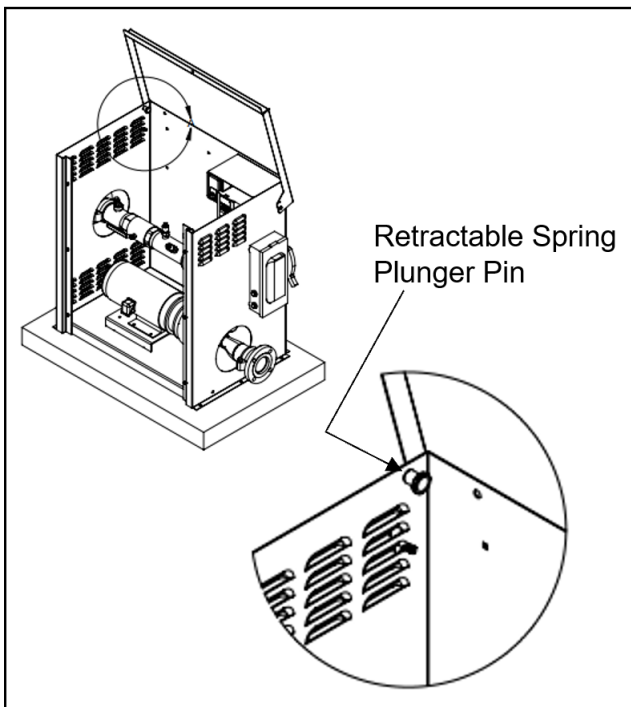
Engaging The Retractable Spring Plunger Pin.
